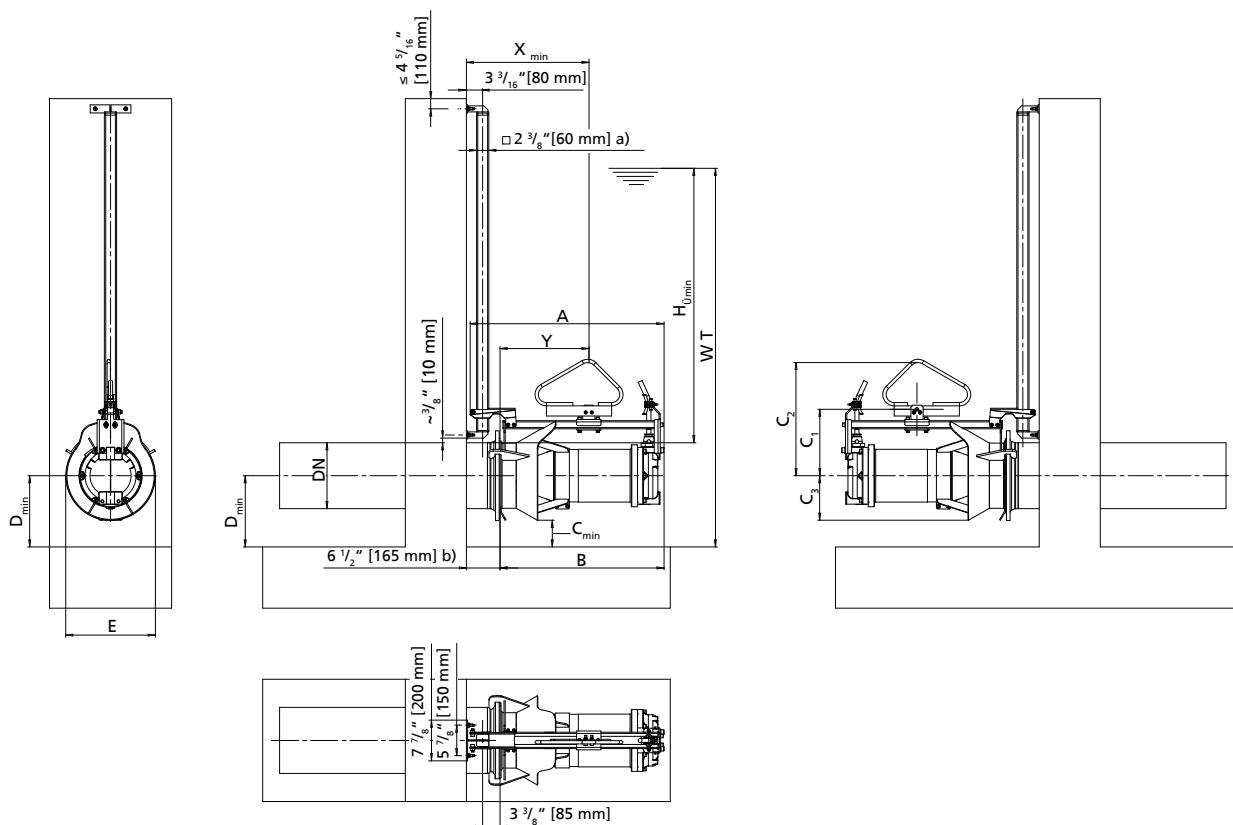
Dimensions of an Amaline 200, 300, 400; motor housing made of stainless steel
